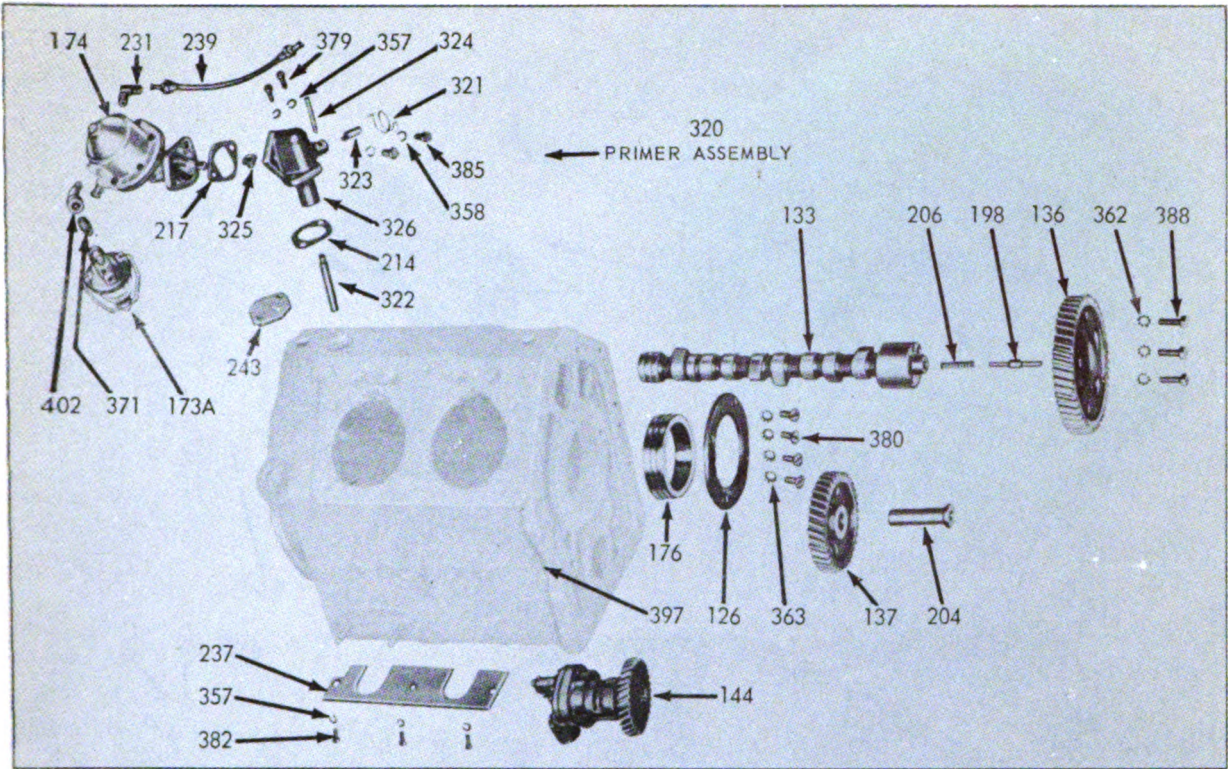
, CAMSHAFT AND FUEL PUMP MOUNTING GROUP
